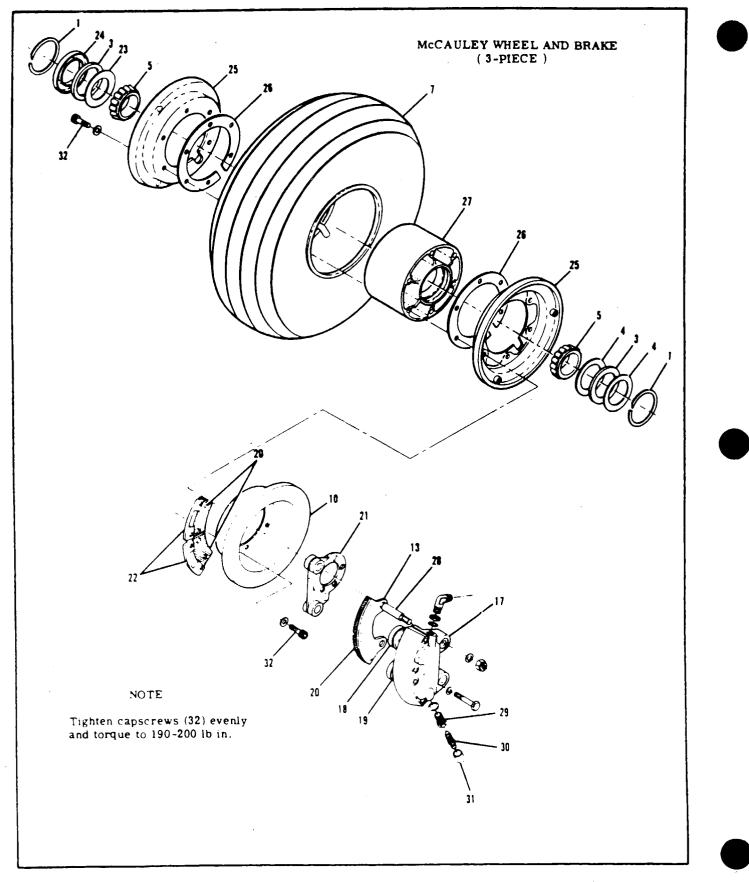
Main Landing Gear Wheel, Tire and Brake Assembly (Sheet 3 of 3)
